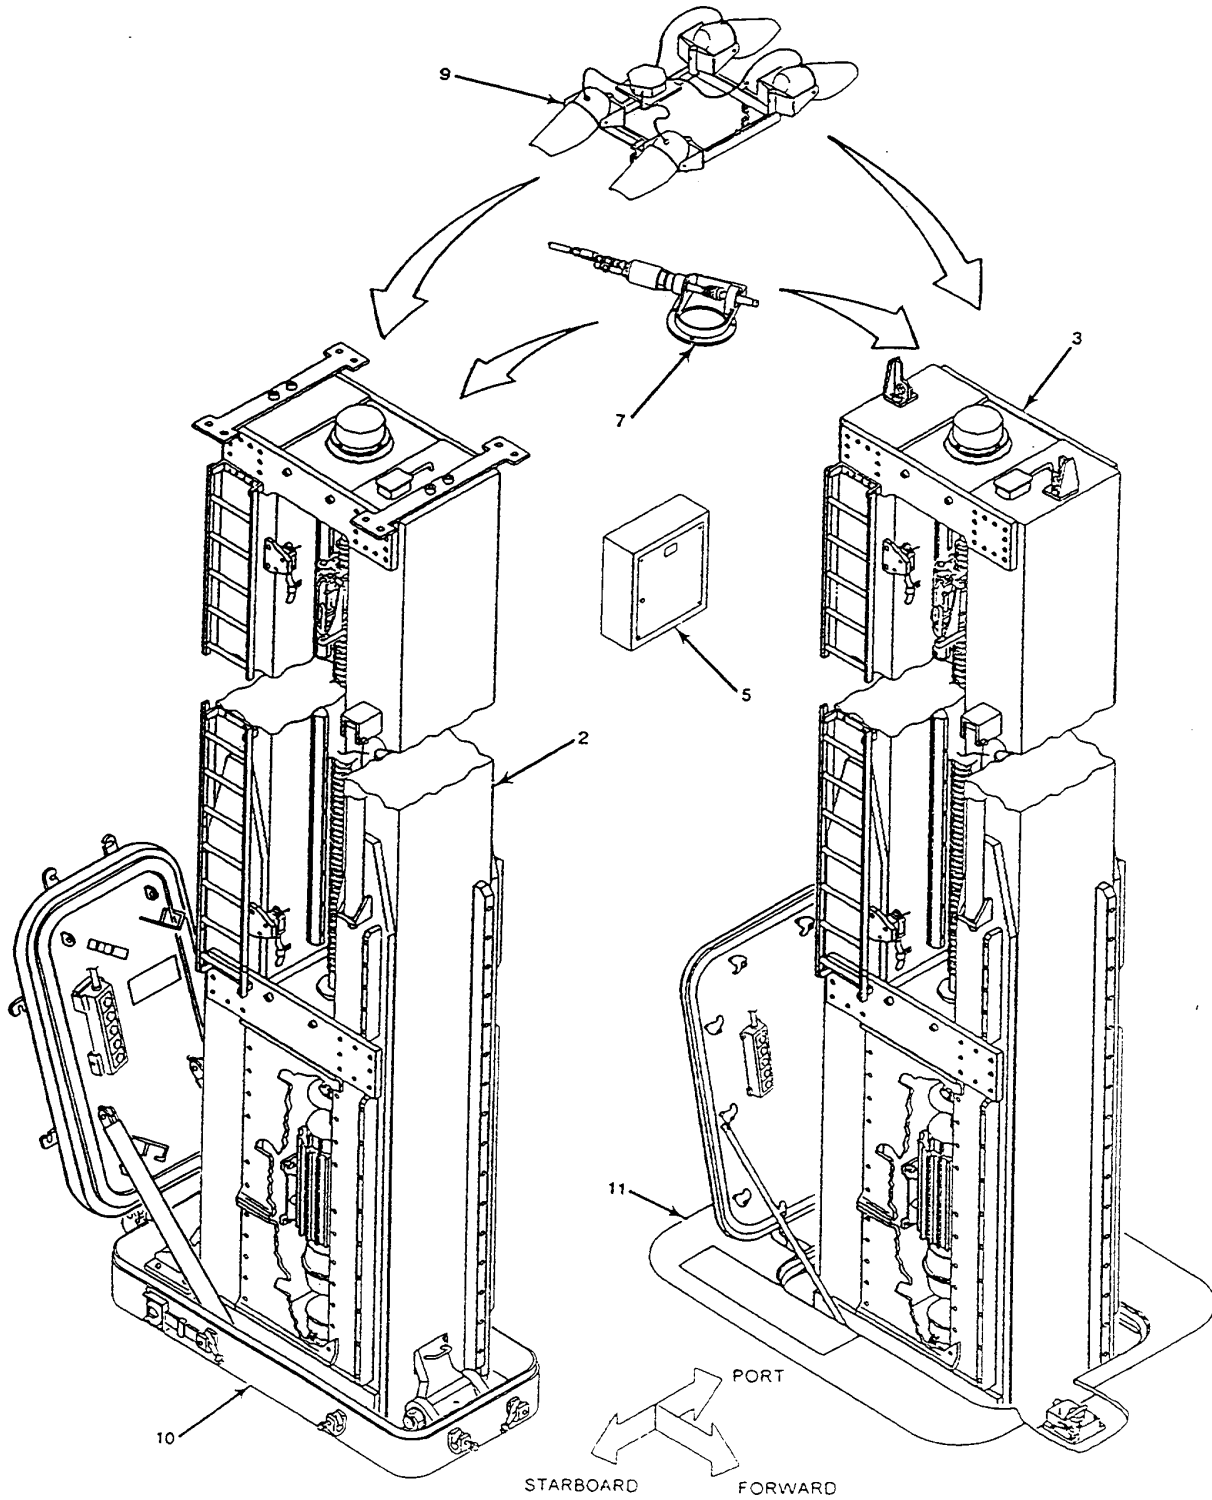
Sliding Padeye Assembly Installation (Sheet 2 of 2)
